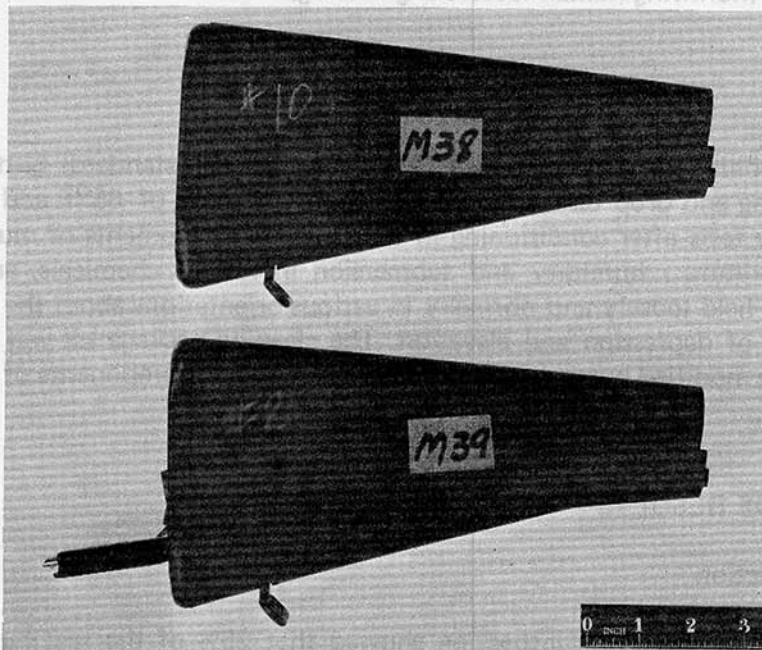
Side View of Modified Buttstock with Trap Door Assembly. TOP: Closed. BOTTOM: Open.
